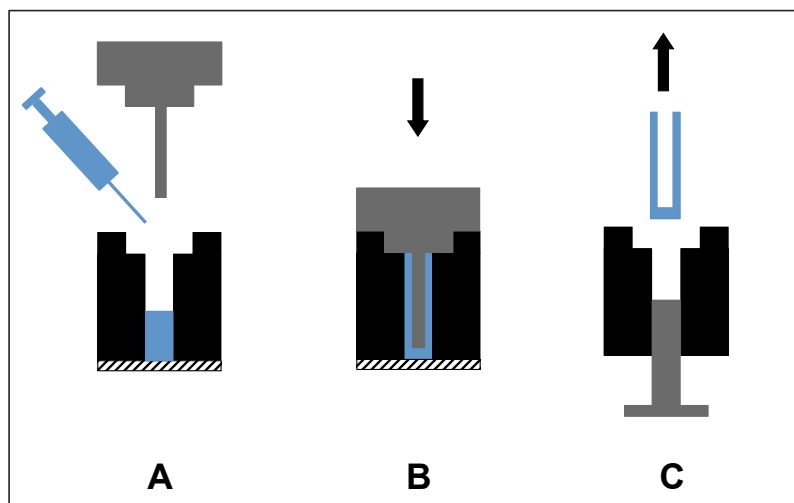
Fabrication method used to create HA-DVS hollow cylinders. (A) HA-DVS solution is pipetted into a mold. A glass plate seals the bottom of the mold. (B) Upper cap is inserted into the mold while the crosslinking reaction occurs. (C) Both the upper mold and glass plate are removed and the finished hollow cylinders are removed from the mold using a custom plunger.
